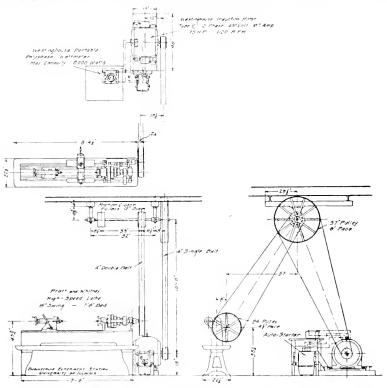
GENERAL ARRANGEMENT OF APPARATUS USED IN THE TESTS WITH HIGH-SPEED TOOL STEELS
